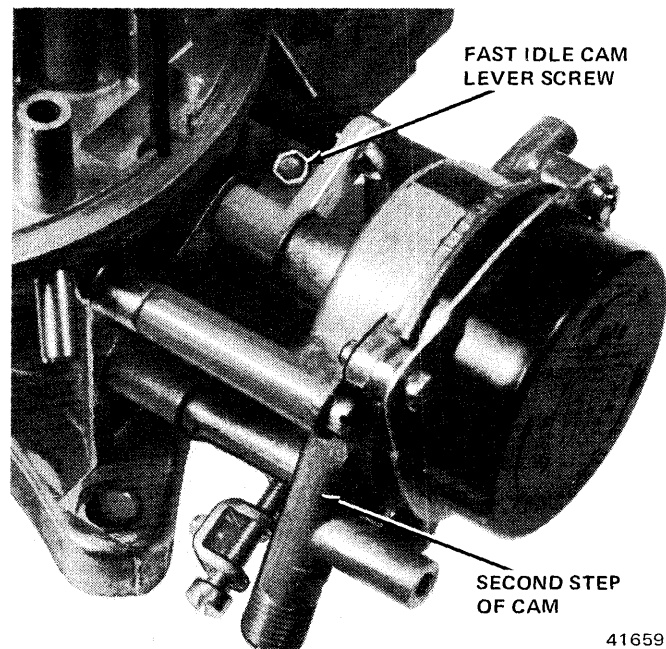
Fast Idle Cam Linkage Adjustment
